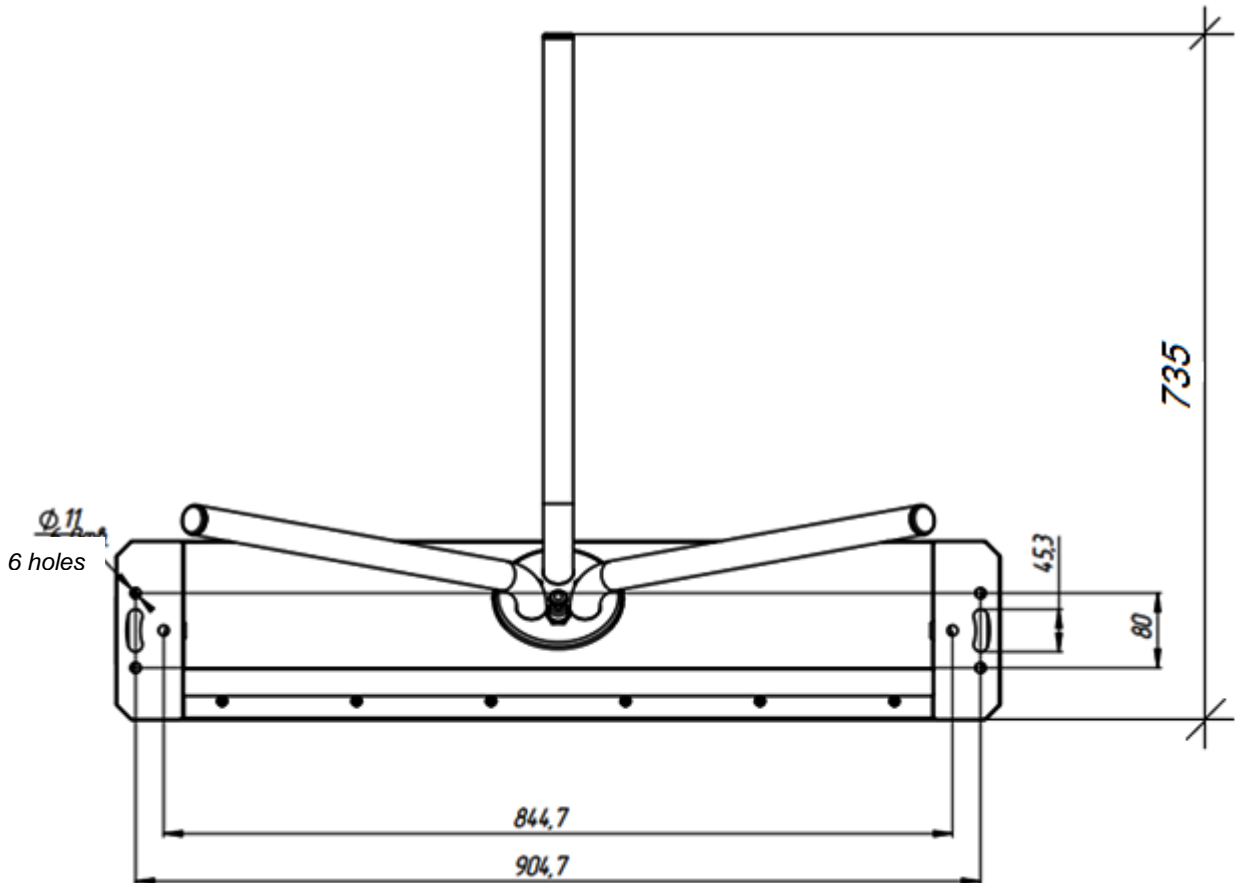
Layout of mounting holes in relation to turnstile external dimensions
